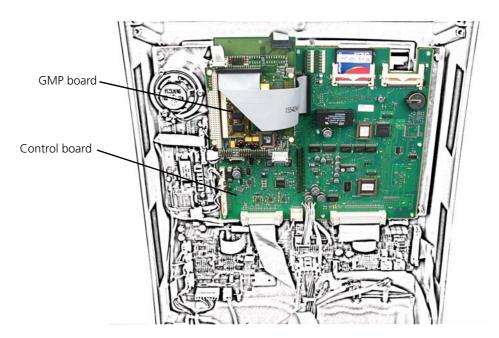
Position of the control board and GMP board inside the front enclosure
